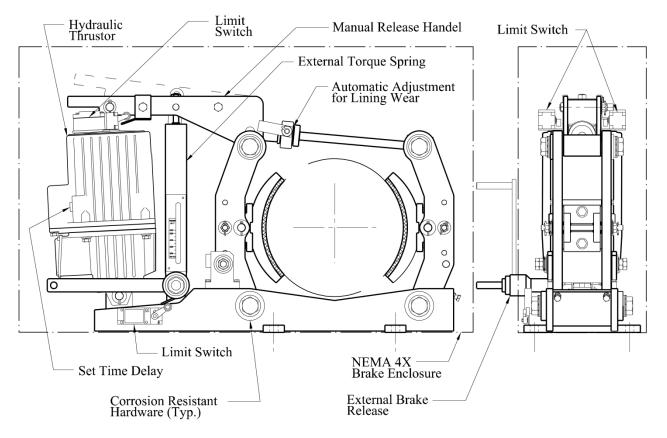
Thruster Type Electrically Released Shoe Brake
